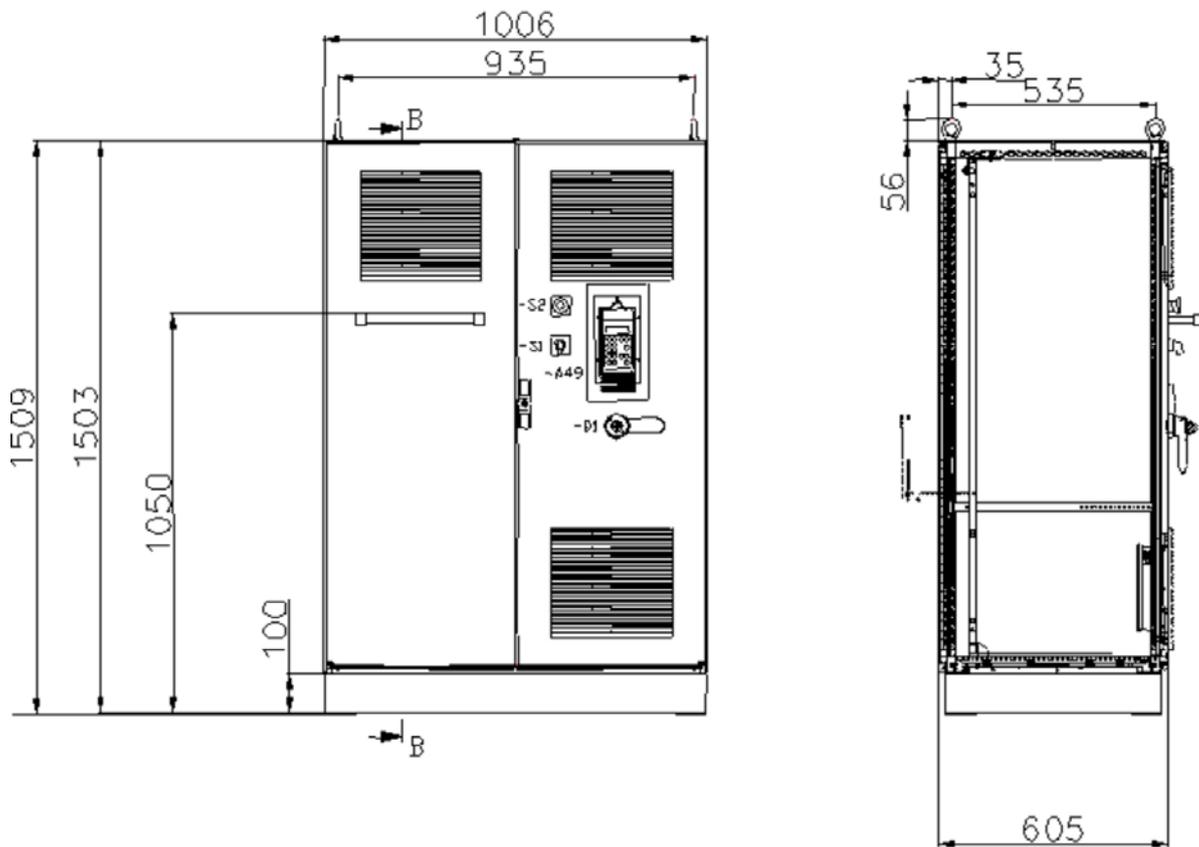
Typical dimensions of one Steering Drive Unit for Azipod CO
